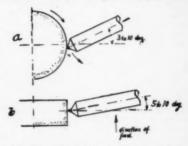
a andb—Truing the periphery of a grinding wheel; (a) tool perpendicular to face, but inclined in side view and (b) tool inclined to face, but horizontal in elevation.
